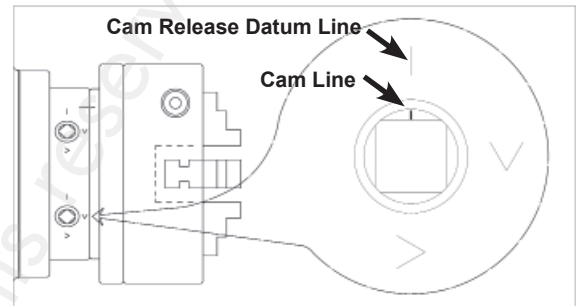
Camlock loosened with the cam line aligned with the datum line
